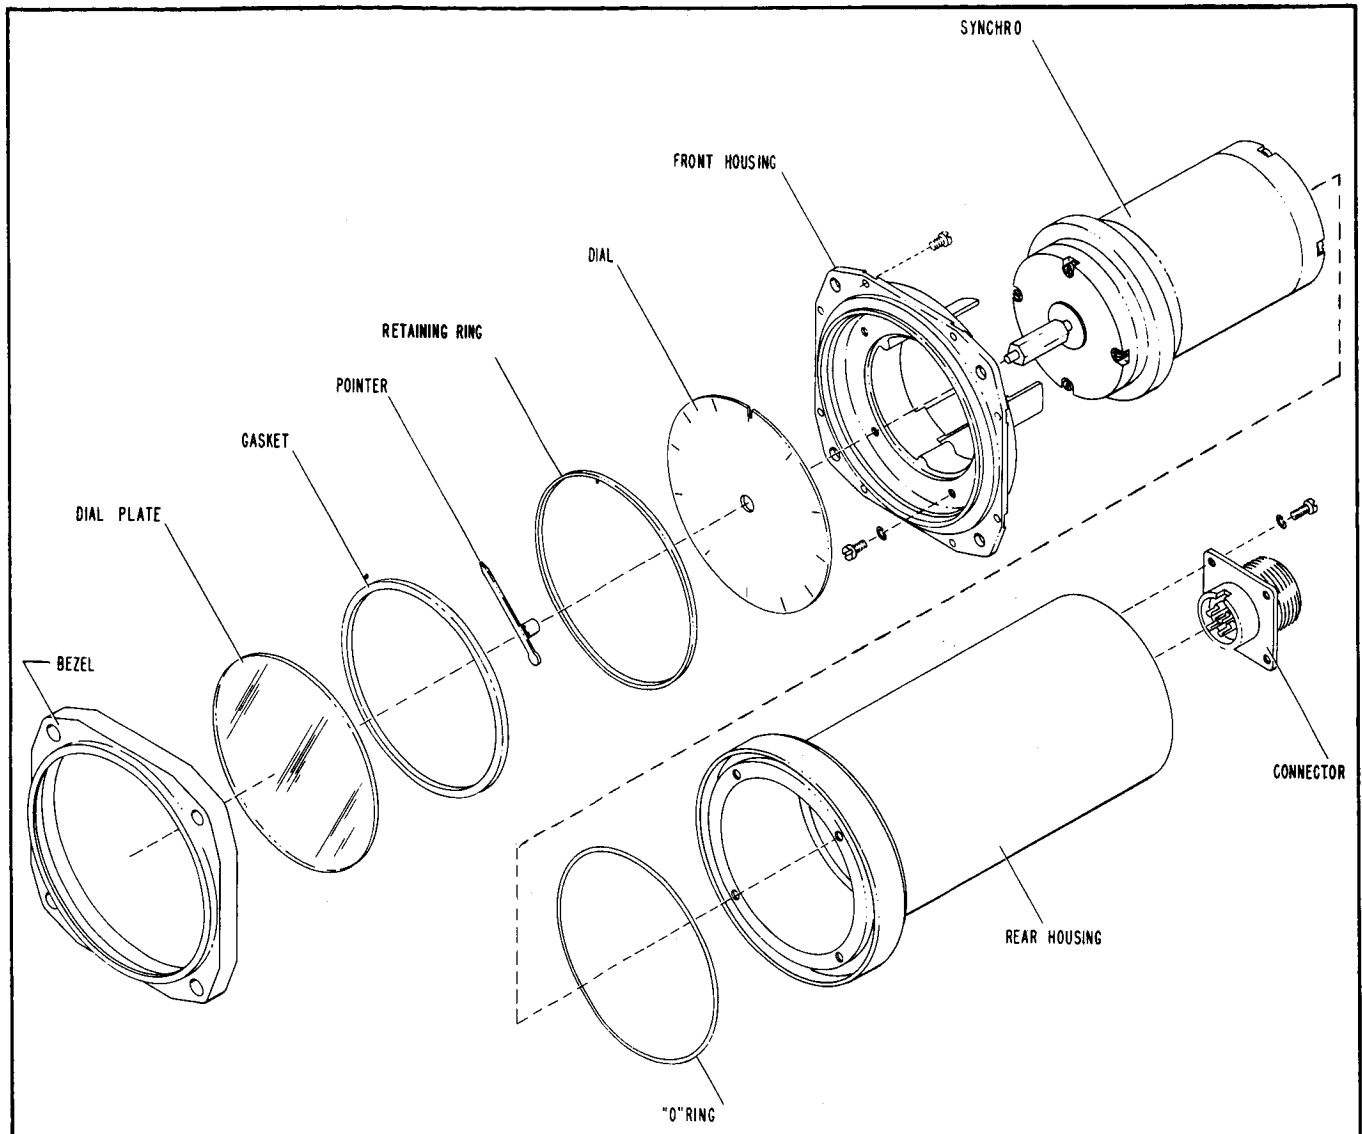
Acquisition Data Console Synchro Receiver, Exploded View
